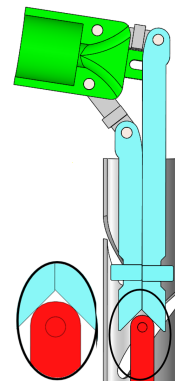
Section and detail view of sloping corners to ease assembly.
